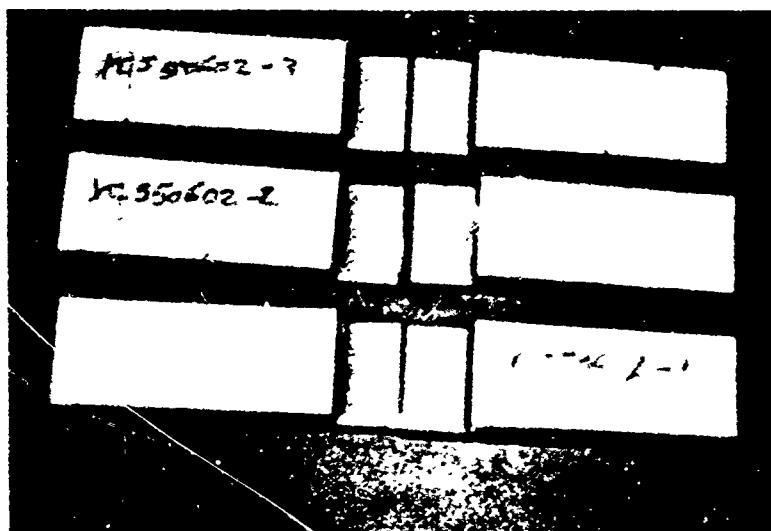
TYPICAL ADHESIVE SHEAR TEST
